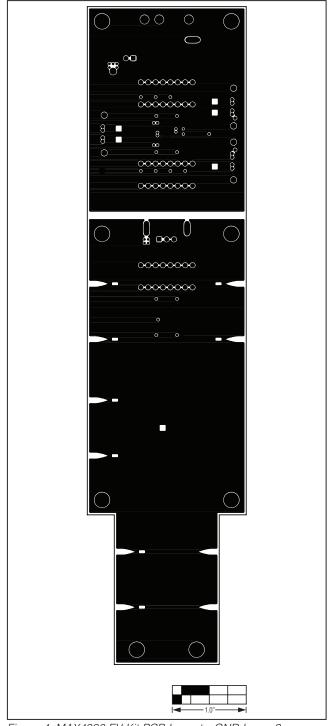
MAX4986 EV Kit PCB Layout—GND Layer 2
